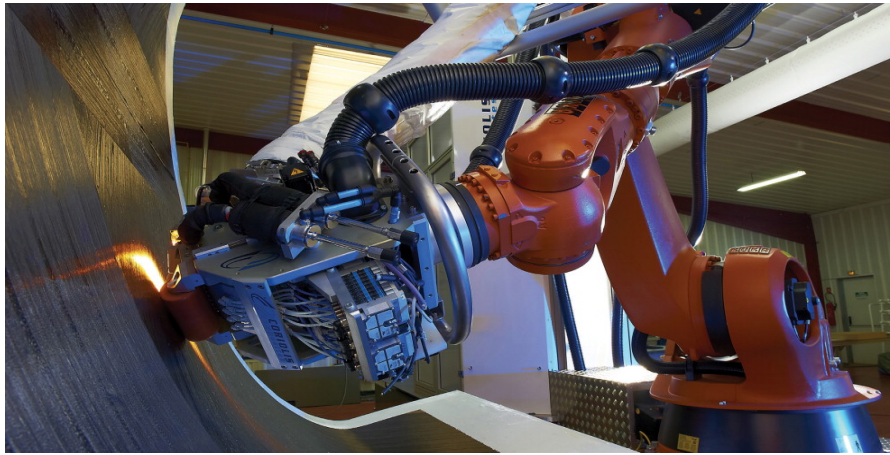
An AFP machine laying down layers on a concave mould [99].
